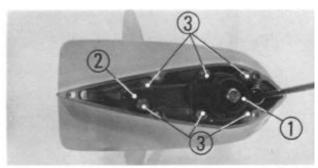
① Impeller housing ② 6 mm bolts ② Cover
